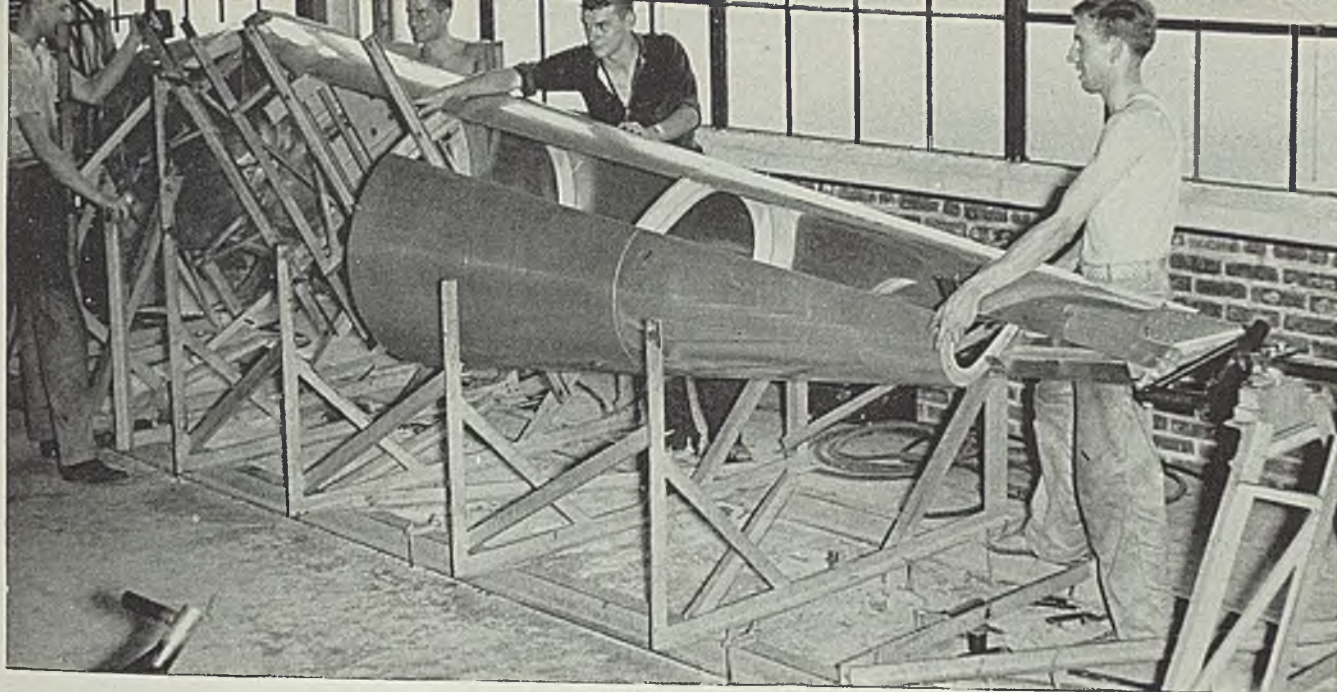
Steel jig in which assembly of plane fuselage starts: Thin aluminum alloy sheets are fitted around bulkheads to provide a monocoque type of construction. Use of this jig insures that each plane will be built to constant dimensions, permitting interchangeability of parts. Fuselage may be revolved to facilitate application of skins to sides and bottom
